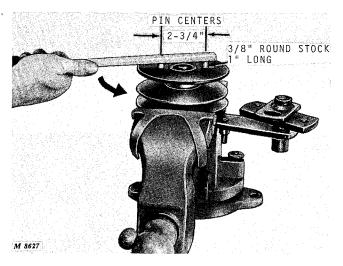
Disassembling Center Variator Sheave (with special tool)
